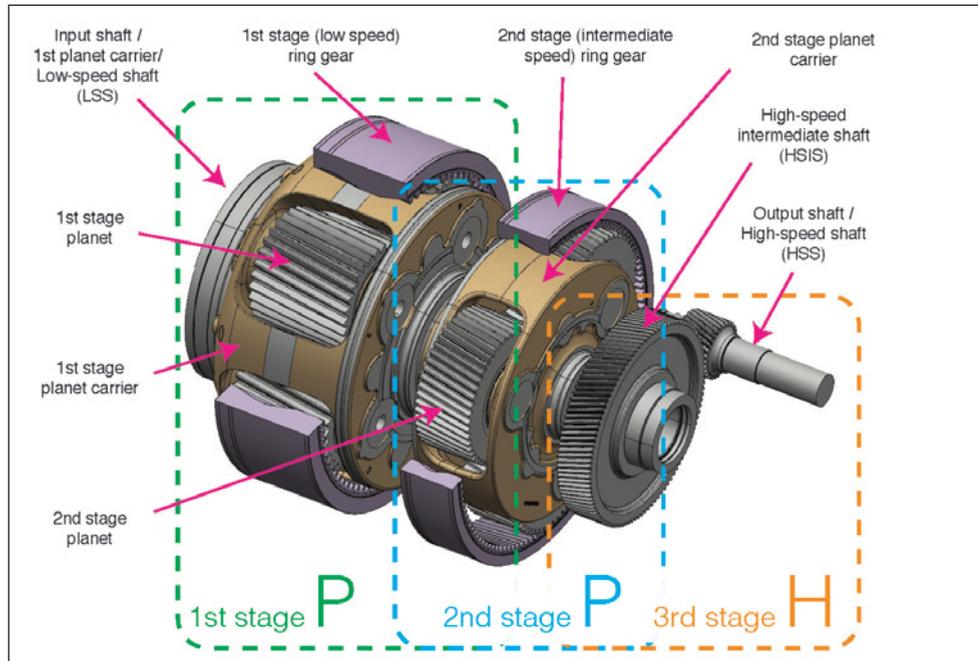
Assembly drawing of shafts and gears from the 3-stage Siemens Gamesa Renewable Energy gearbox (PPH configuration).
